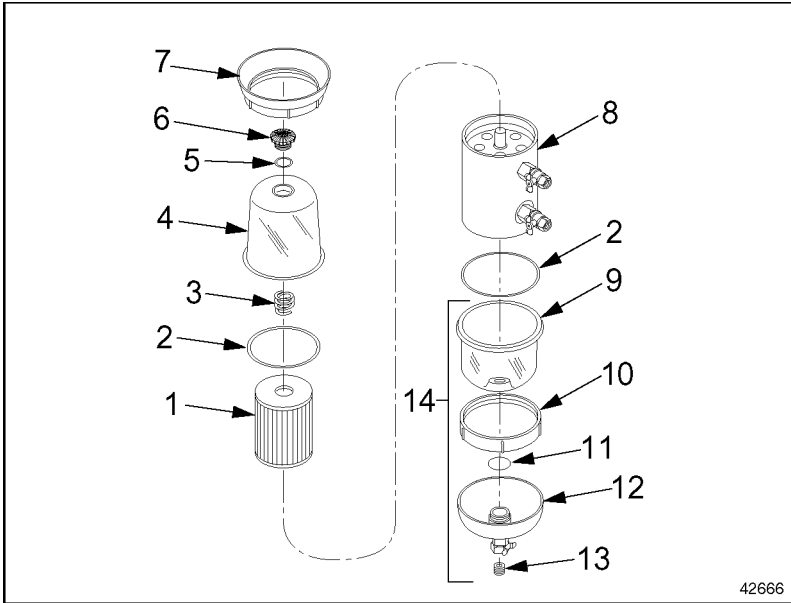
Sea Pro 152 Fuel Processor/Filter Assembly
